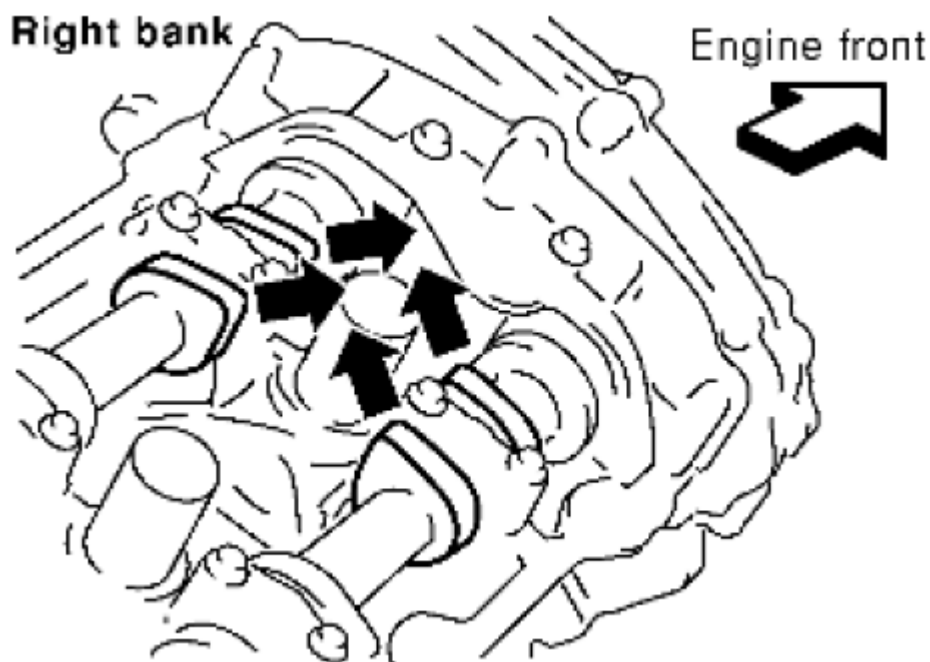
Identifying Intake And Exhaust Cam Noses On No. 1 Cylinder
